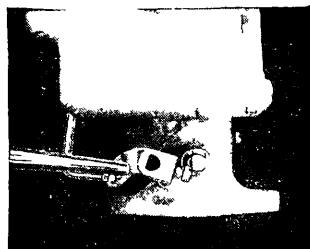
Remove throttle shaft arm and connector rod. Check for wear at lower end of rod and hole in arm
